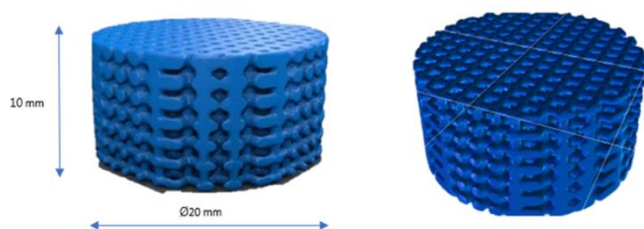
CAD model, used for 3D printing of scaffold specimens
